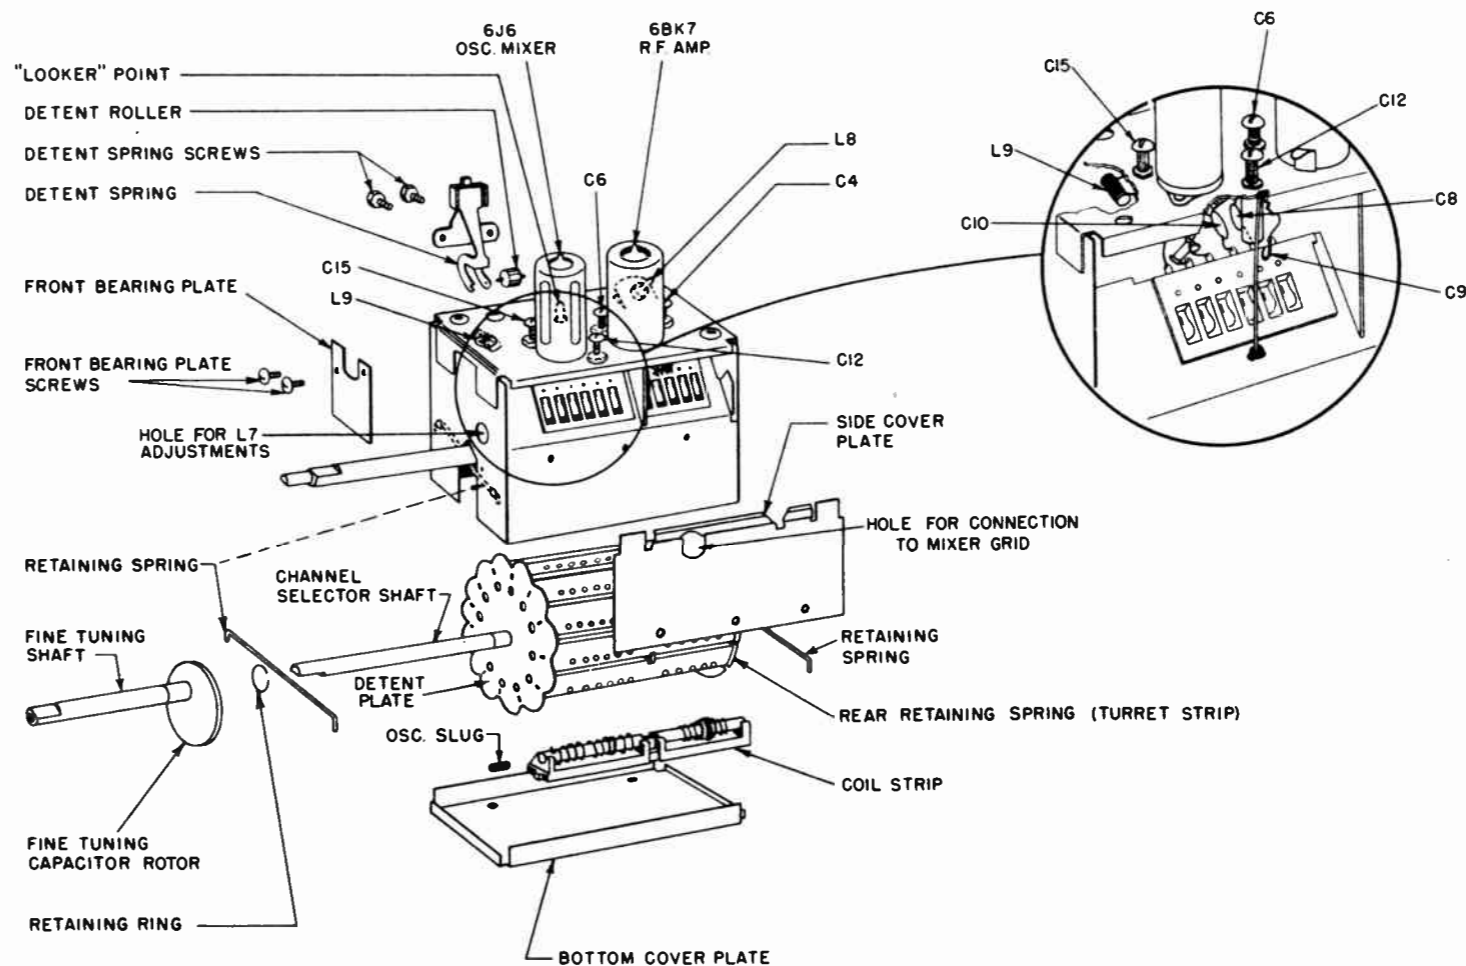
TUNER STRIP REMOVAL 1-508-1
